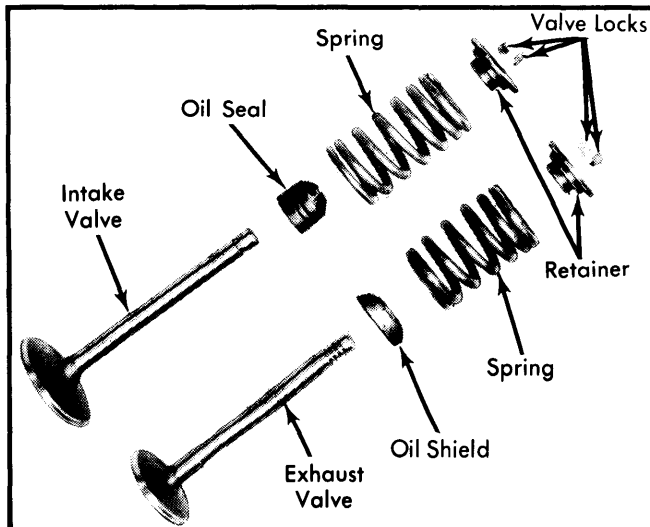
Disassembled View of Intake and Exhaust Valve Assemblies
